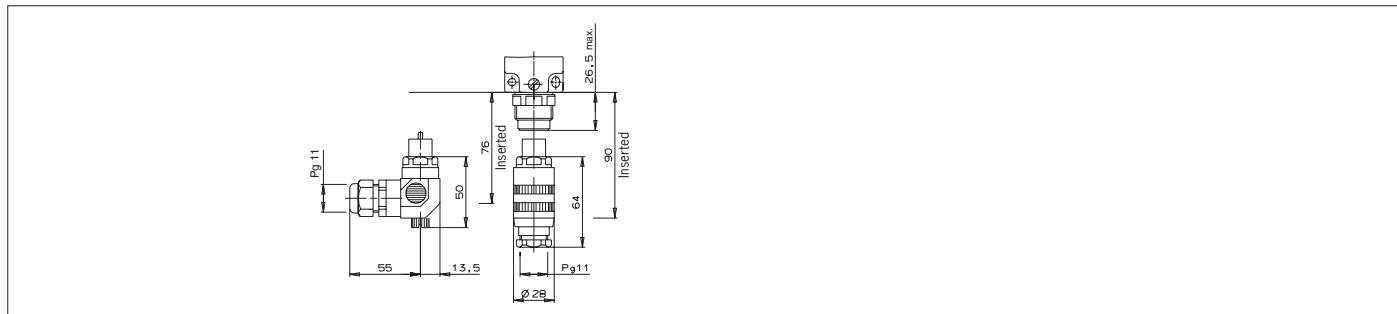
Dimension drawing for NZ2VZ-5... with plug connector SR6
